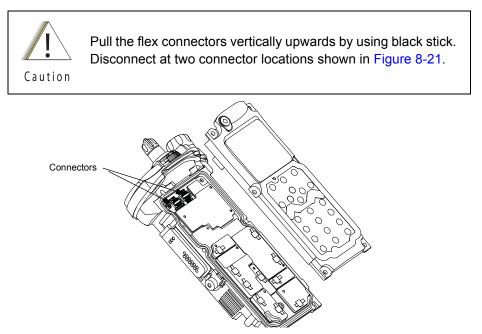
Remove Back Chassis Assembly from Main Chassis Assembly
